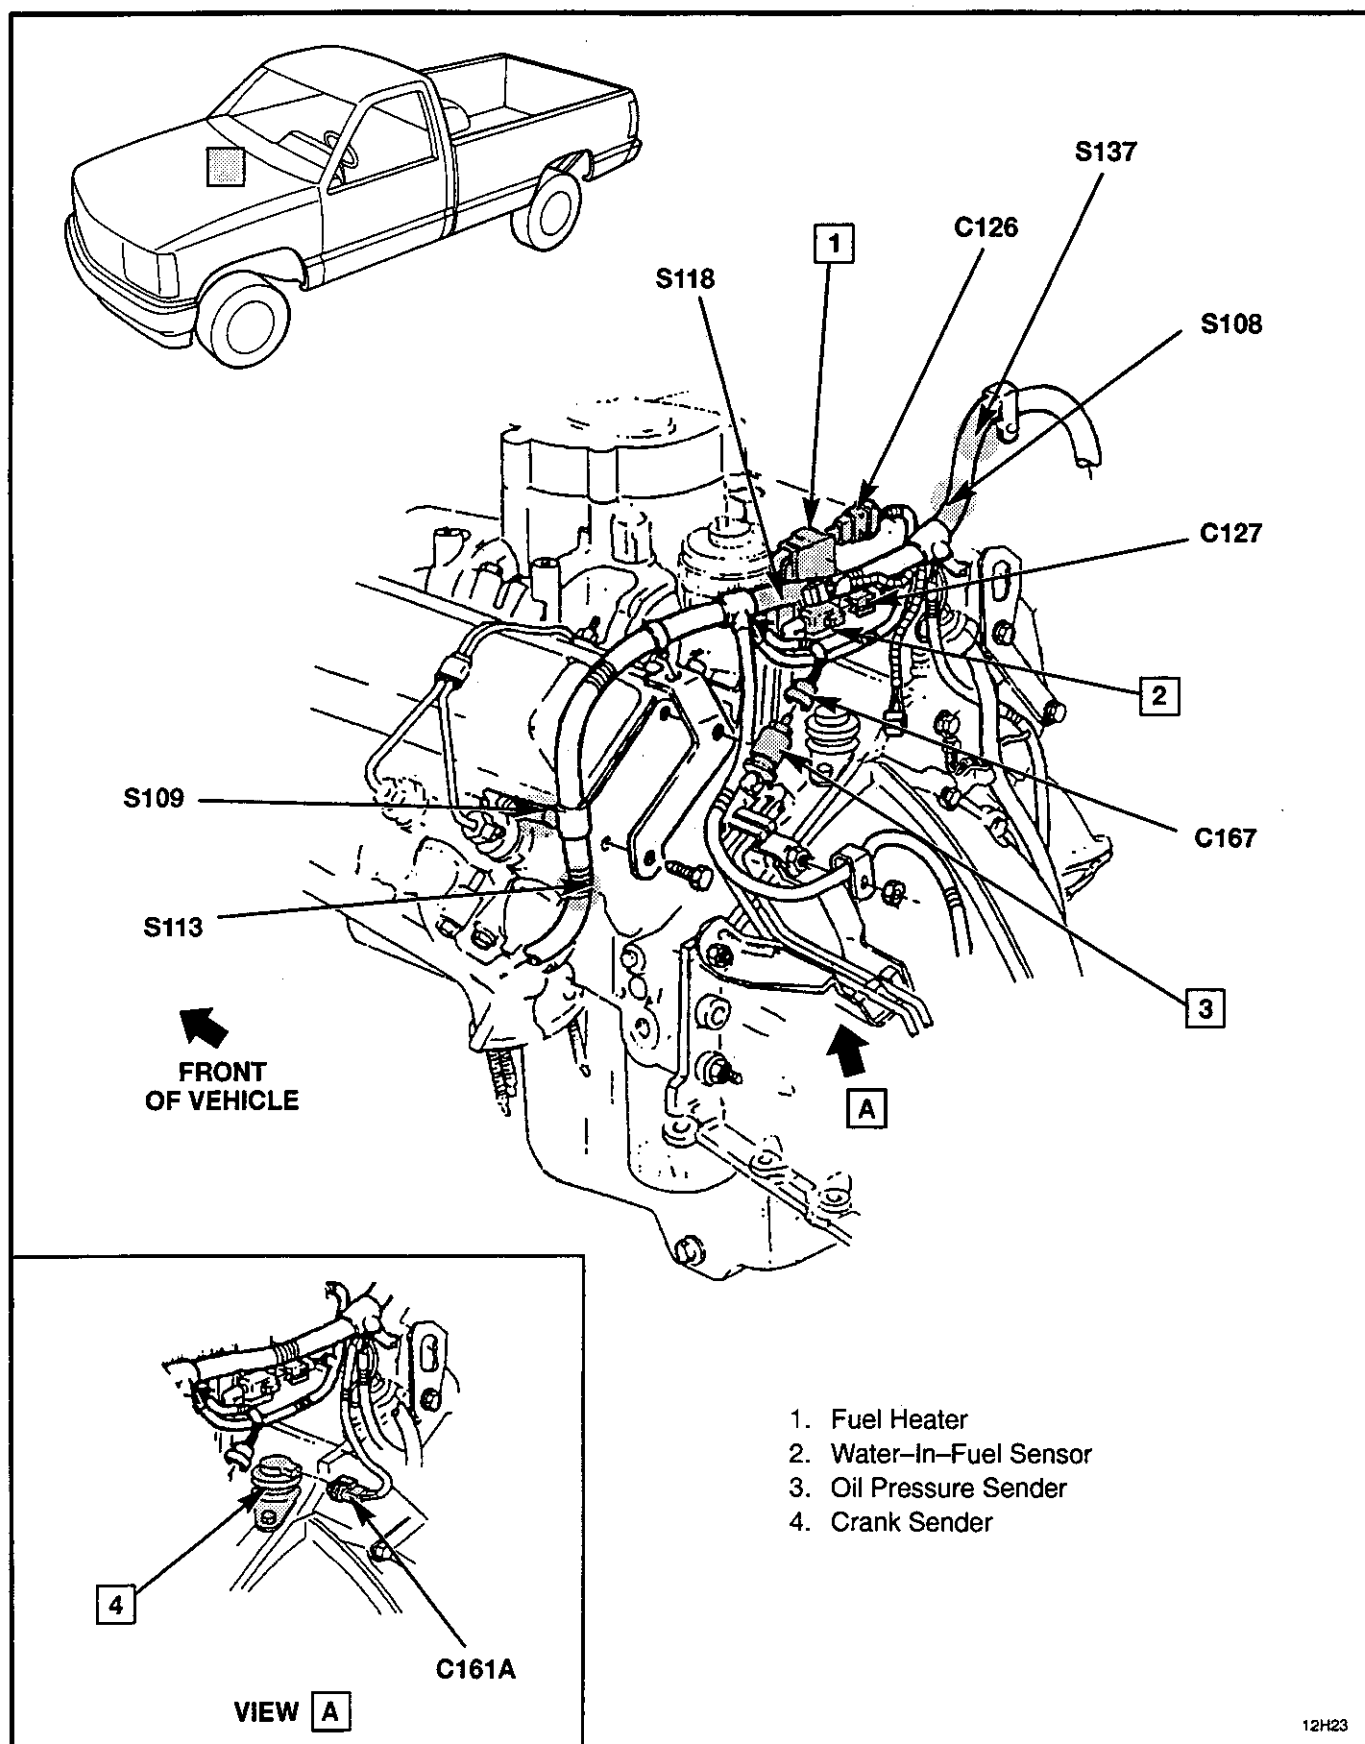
6.5L Diesel Engine Wiring, Rear
